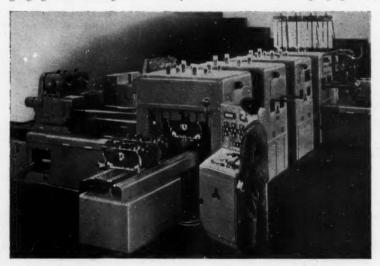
In-line Transfer Machine with Built-in Air-gauging Equipment for Checking the Main and Camshaft Bores of a Motor Car Crankcase
